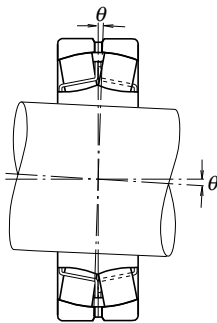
Permissible Misalignment of Spherical Roller Bearings
